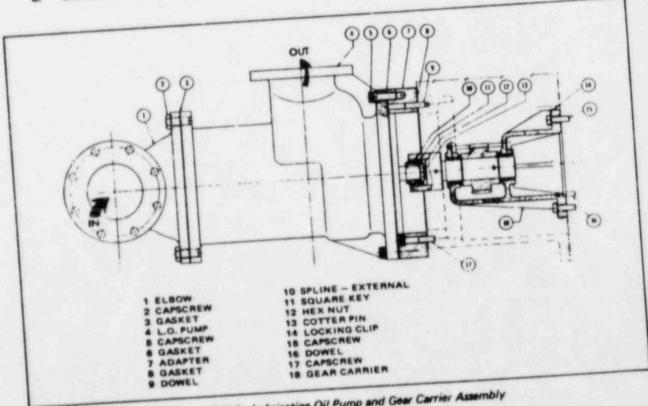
K-1. Lubricating Oil Pump and Gear Carrier Assembly
